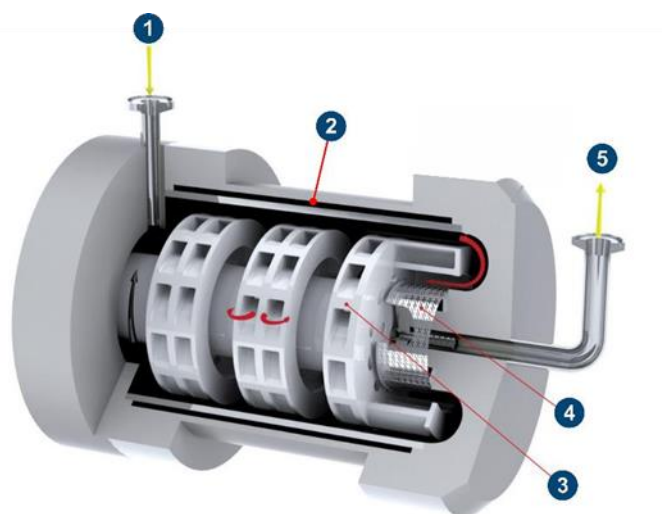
Construction of a pearl mill: 1 - cooling milling container with easy-to-replace grinding cylinder made of hardened or stainless steel, silicon carbide, zirconia, 2- agitator disks made of stainless steel, hardened steel, zirconia, tungsten carbide, polyurethane, polyamide, 3 - product inlet, 4 - dynamic gap separator, 5 - product outlet, 6 - accelerators made of hardened chromium alloy, polyethylene oxide or zirconia
